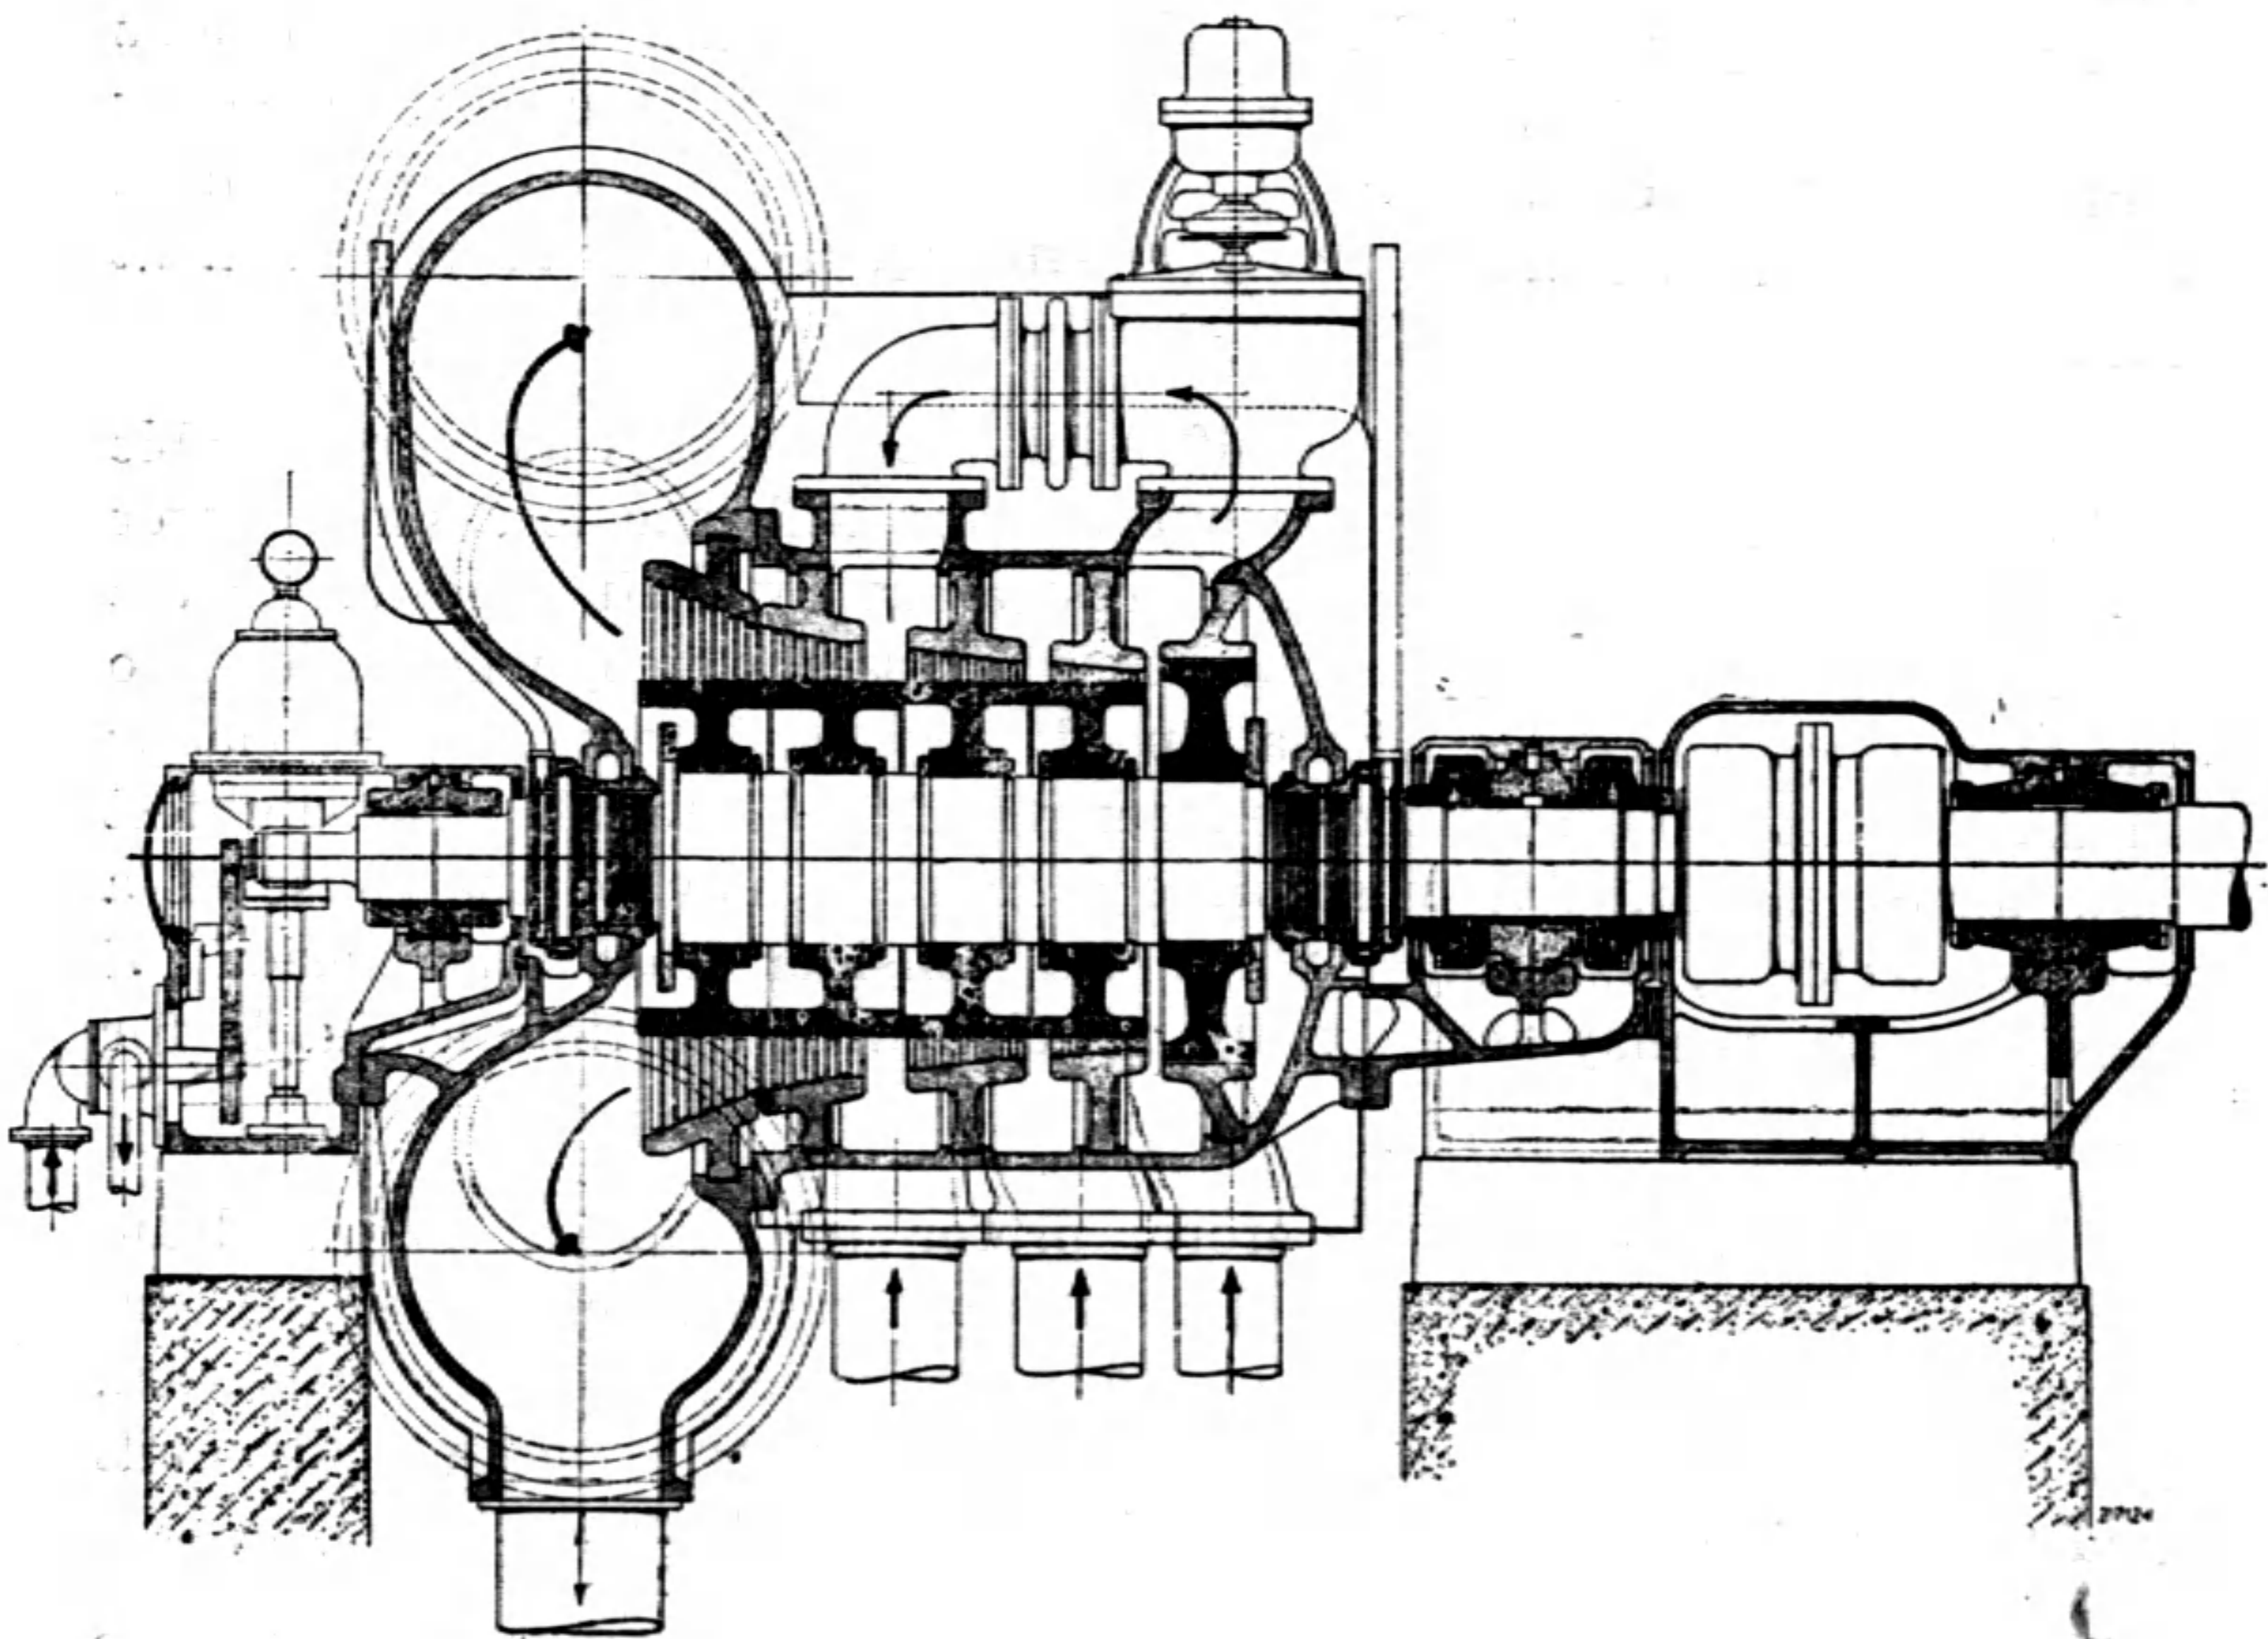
Section through H.P. turbine 75,000 kw., 1,800 rpm.
